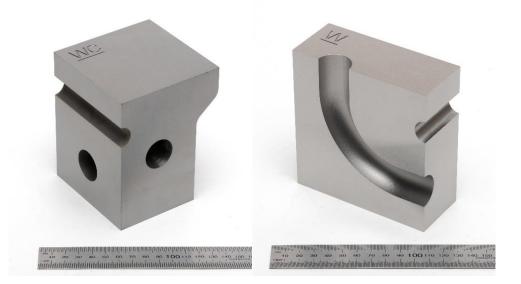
STEP inboard tungsten shield manufacturing demonstrator parts
